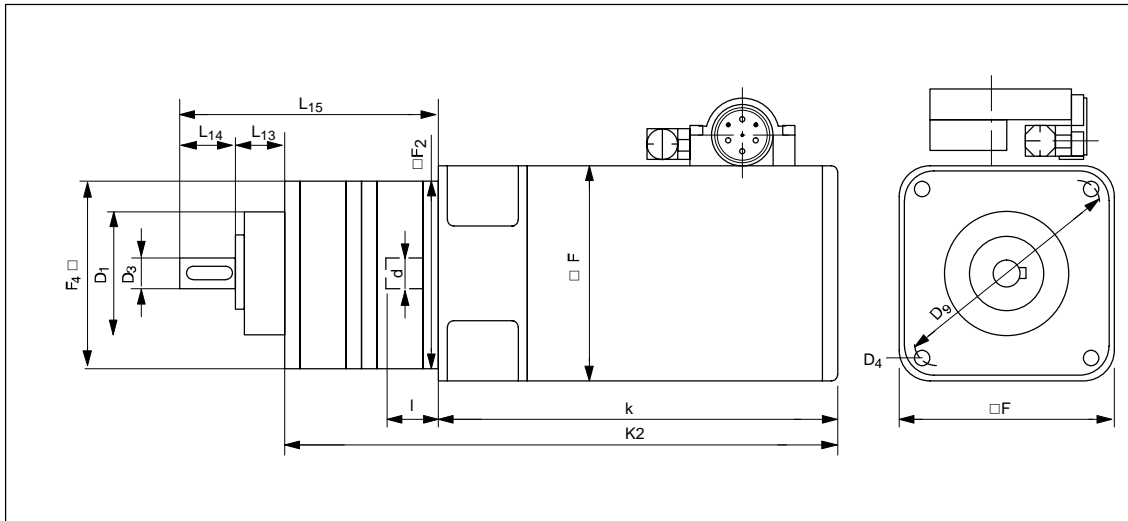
1FT5 motor with planetary gearbox (alpha Company) SPG 1 stage dimensions in [mm]
